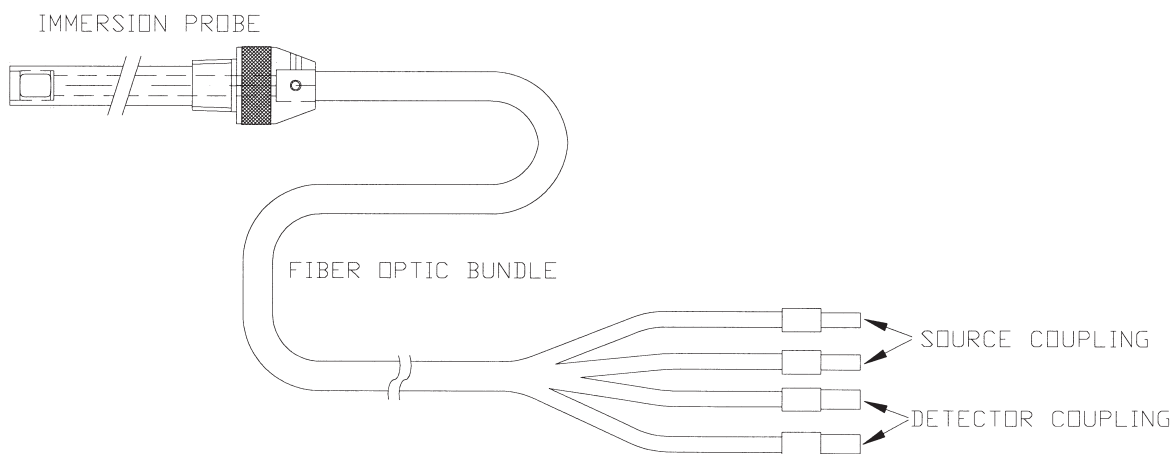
Fiberoptic Bundle Assembly (400-303.1)
